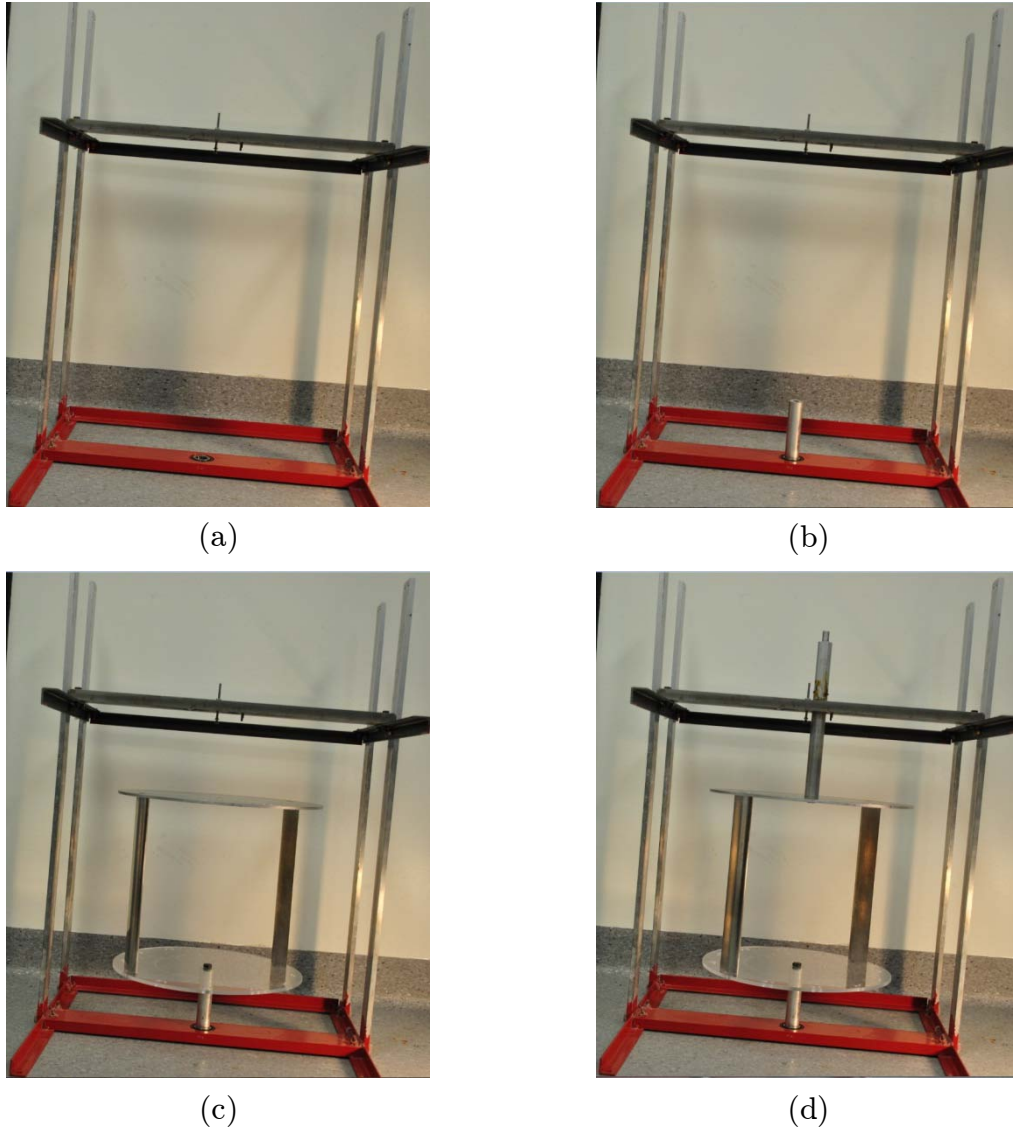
The turbine assembly on the supporting frame (a) supporting frame, (b) bottom shaft placement, (c) turbine placement in the bottom shaft, and (d) top shaft placement
